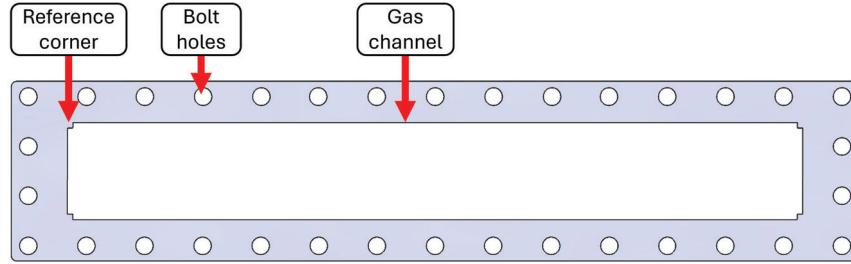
The diffuser bolt flange includes through holes matching the bolt pattern on the cooling chamber, a large channel for gas flow, and reference corner features in the corners of the gas flow cutout used to aid in positioning the diffuser panels during welding.
